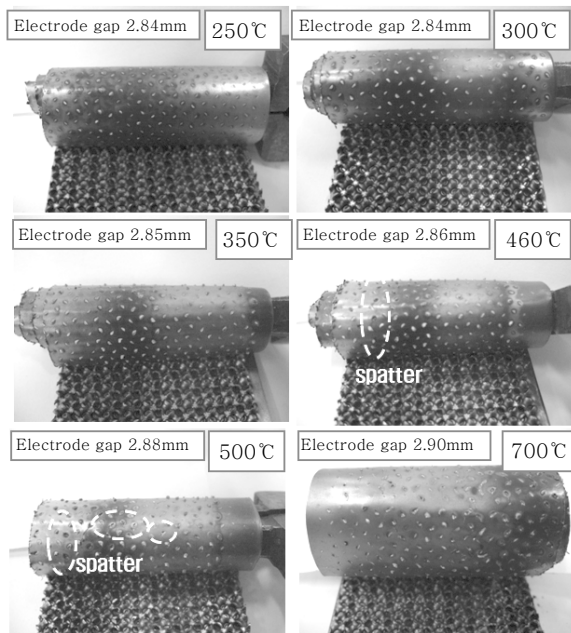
T-peeled weldments according to skin sheet temperature (skin sheet material : DP590)
